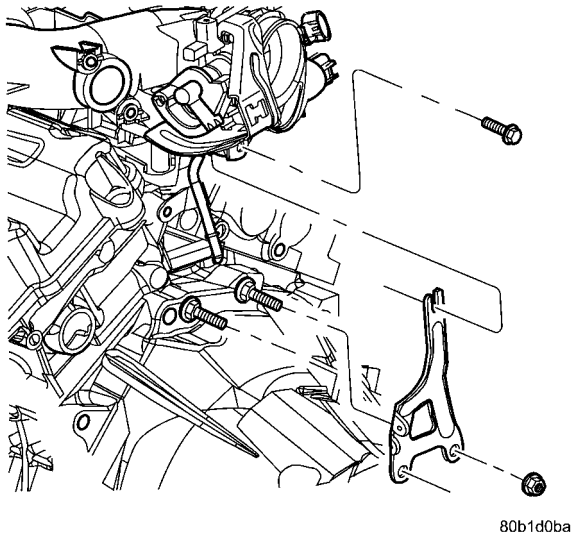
THROTTLE BODY SUPPORT BRACKET 2.7L
